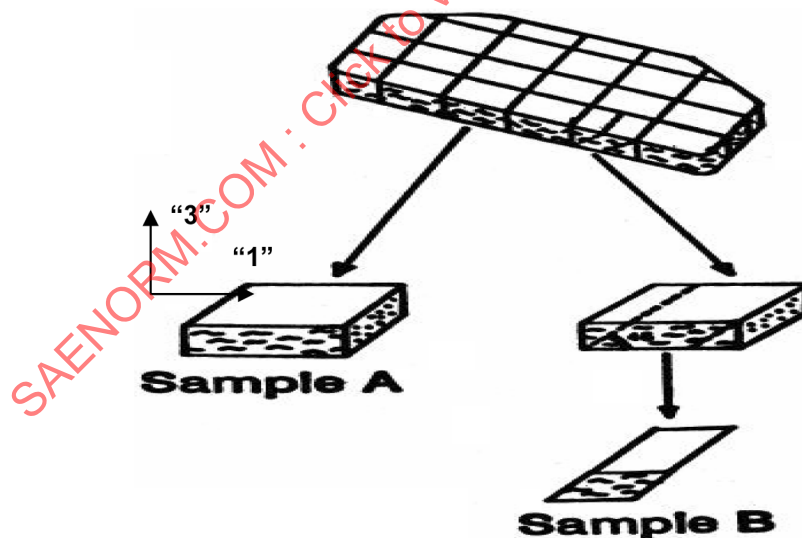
TYPICAL CUTTING DIAGRAM FOR BRAKE PAD
